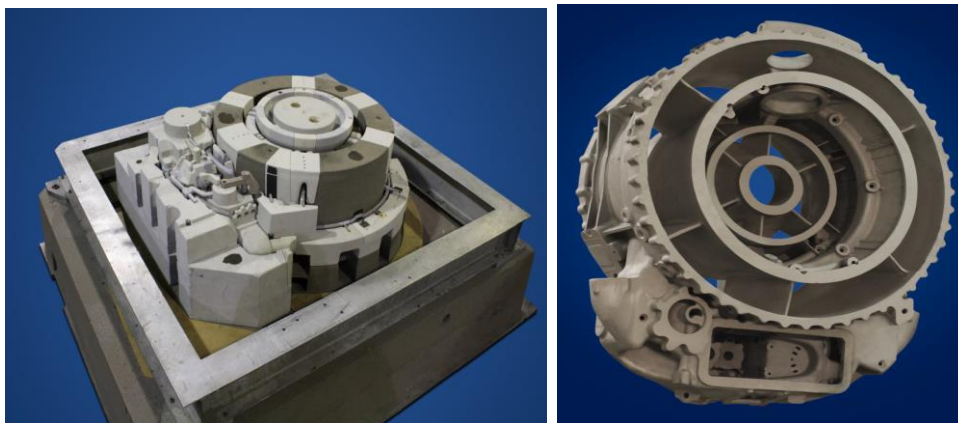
(a) Mold assembly for P&WC 535 Air Inlet (b) P&WC 535 Air Inlet [22]
